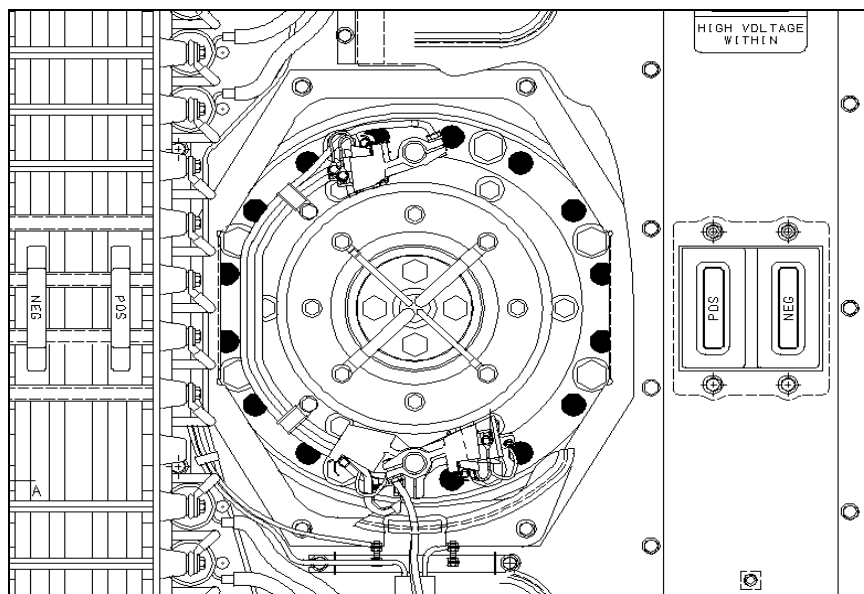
The 16 black holes represent the production fix (new and remanufactured generators).
